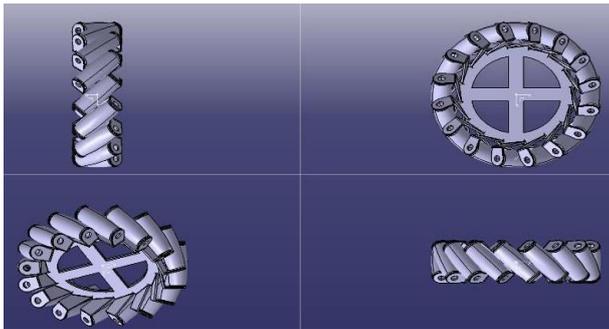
4-View of Mecanum Wheel Designed In GSD WORKBENCH
